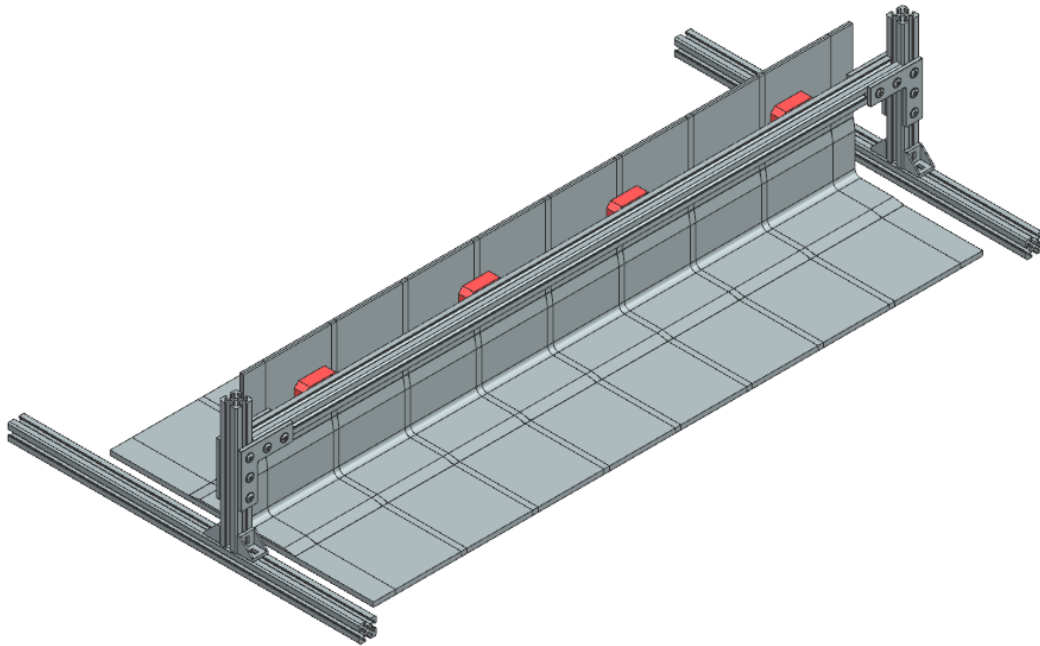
CAD render of fixture used to position webs during co-curing.
